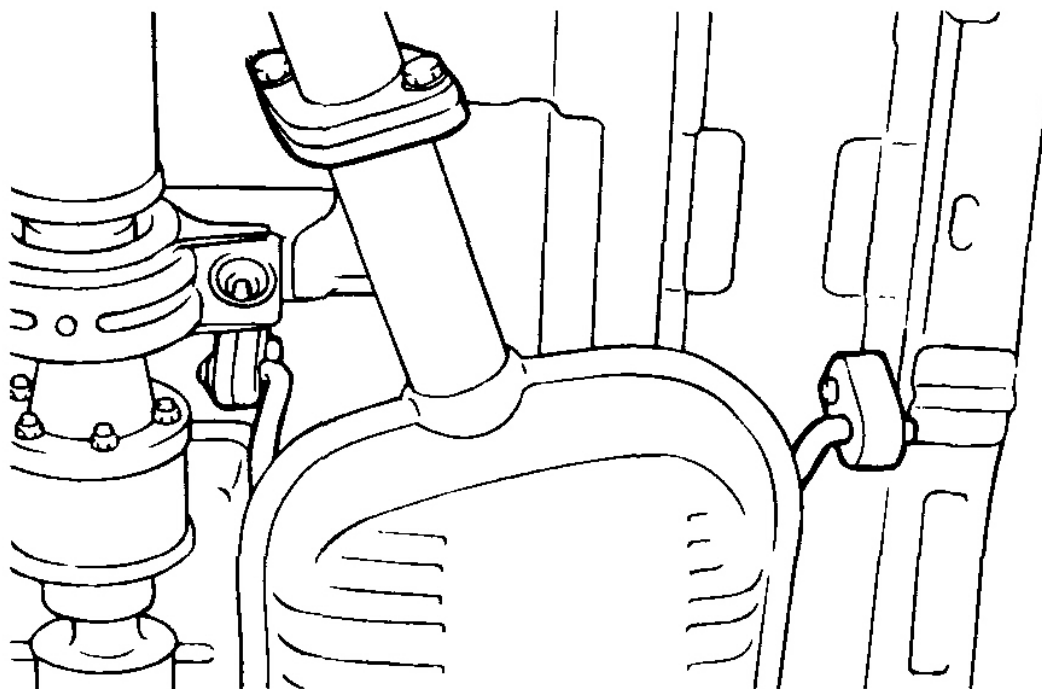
Removing Front Exhaust Pipe Bolt And Exhaust Manifold Pipe Mounting Nuts
